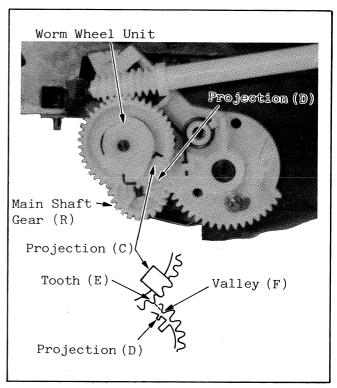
Adjustment of Cassette Up Gears-(4)
